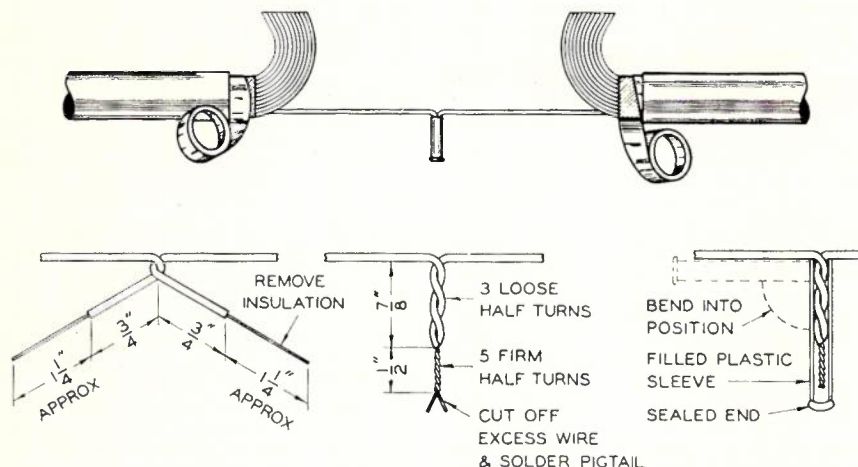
Anaconda Cable Co. Conductor Jointing Technique.
